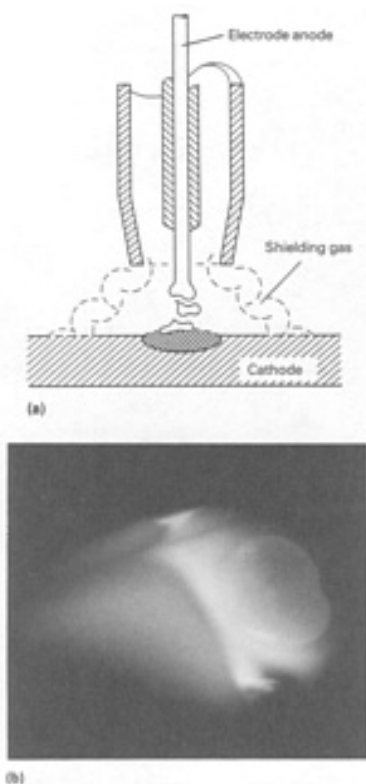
GLOBULAR TRANSFER MODE IN GAS-METAL ARC WELDING OF STEEL. (A) SCHEMATIC SHOWING TRANSFER OF ELECTRODE MATERIAL GLOBULES ONTO CATHODE BASE METAL. (B) HIGH-SPEED PHOTOGRAPH OF GLOBULAR METAL TRANSFER
